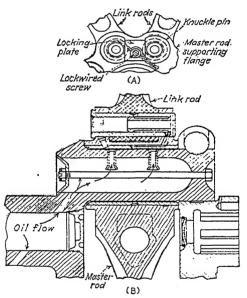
(A) Method of holding link pins in place, and (B) section through the crankpin and a link pin of a Lycoming Type R-680 nine-cylinder radial engine showing the means provided to lubricate the link-pin bearing.
